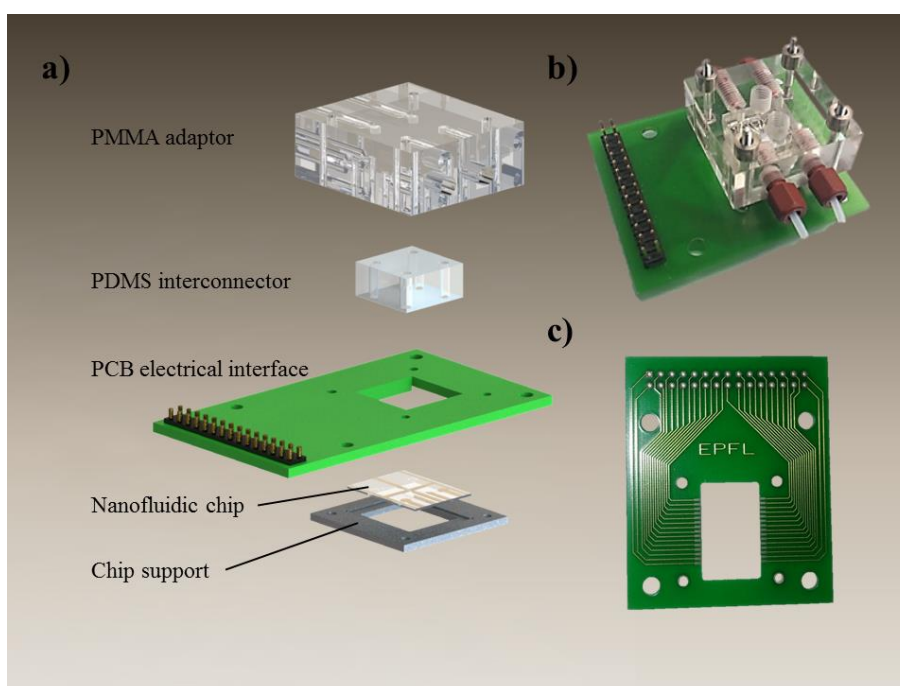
a) Exploded view of the mounting parts of the setup. The device is put on an aluminum support and is fastened to the PCB interface using screws. A PDMS interconnecting block stays between the device and the PMMA adaptor that prevents liquid leakage while it is kept under pressure. b) A photograph of a mounted setup. c) Simple design of the PCB.
